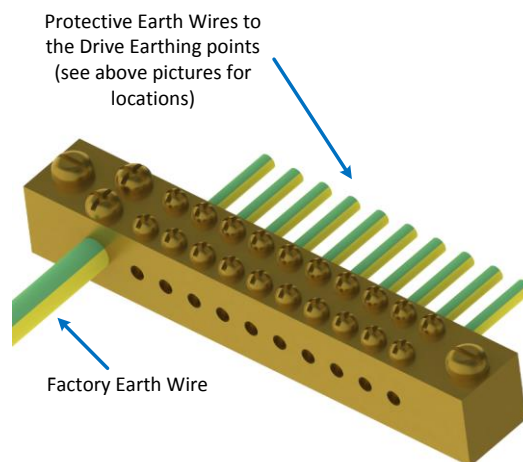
Use Star Topology to Connect Drive Protective Earth to Earth Bar
